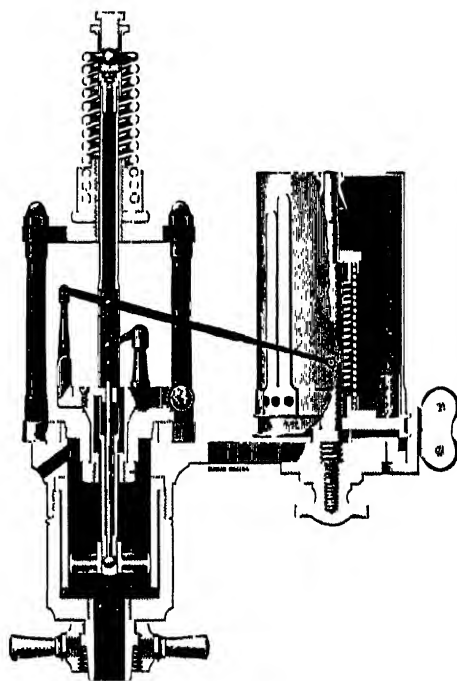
SECTION OF A STEAM ENGINE INDICATOR.
